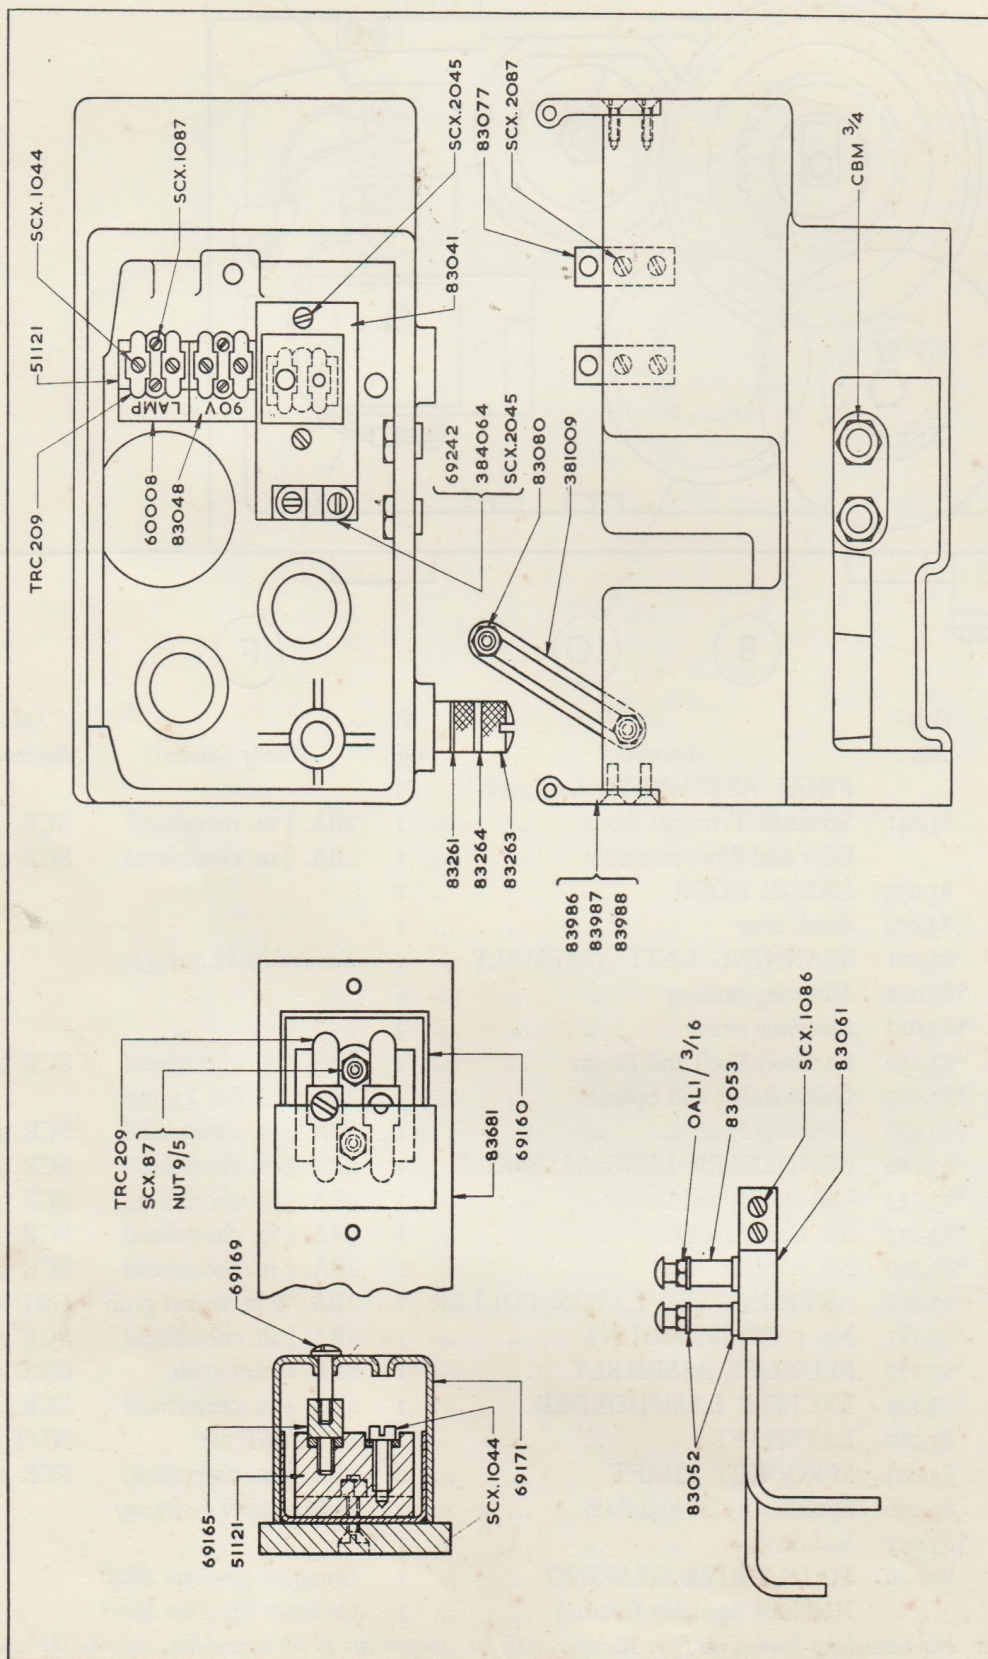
SOUNDHEAD—BODY ASSEMBLY
